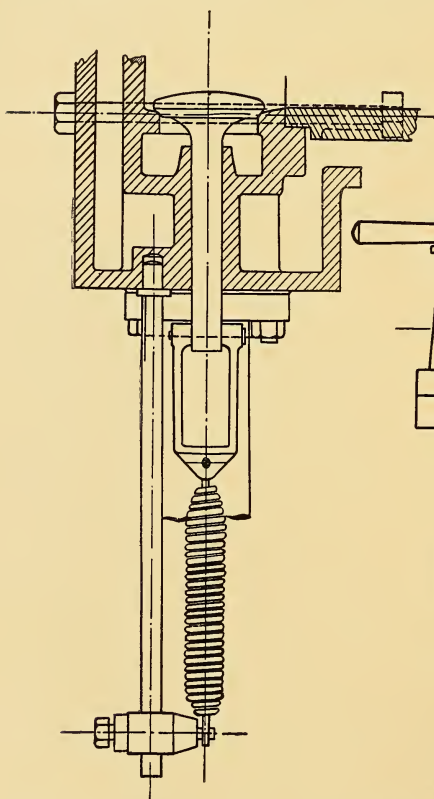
Exhaust valve of a National Gas Engine. Mushroom type. Four Cycle Engine.
